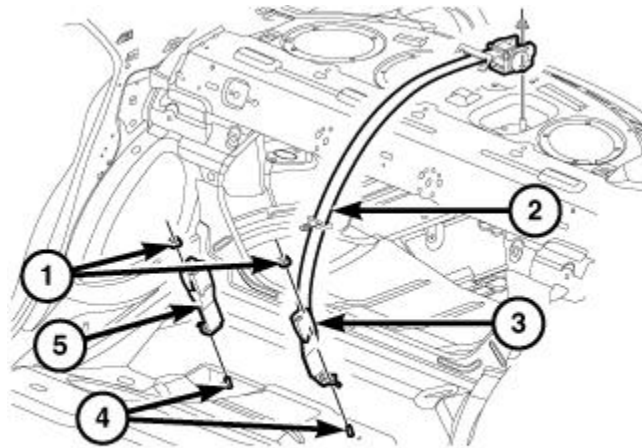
Center Rear Seating Position Buckles, Left Outboard Rear Seating Position Buckle & Center Rear Seating Position Seat Belt And Retractor
